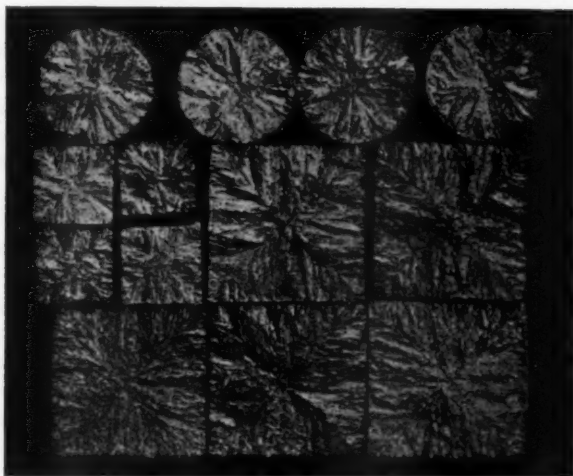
SPECIMENS CAST IN HEAVY IRON "CHILL CUPS."
